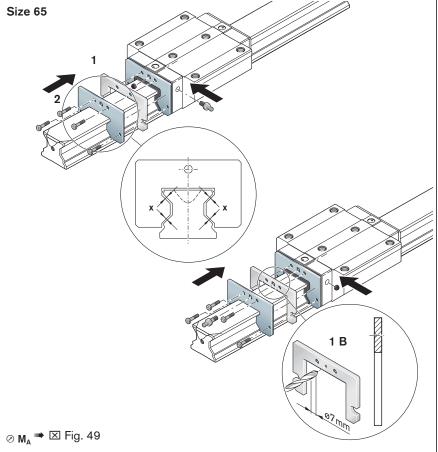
Mounting the FKM seal kit with metal scraper, size 65
